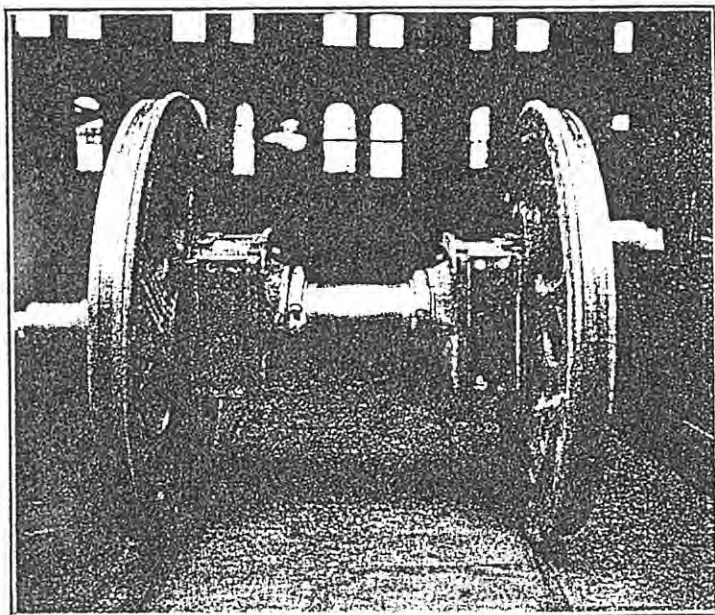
Dynamically Balanced Main Driving Wheels with S.K.F. Self-Aligning Roller Bearing Axleboxes.
